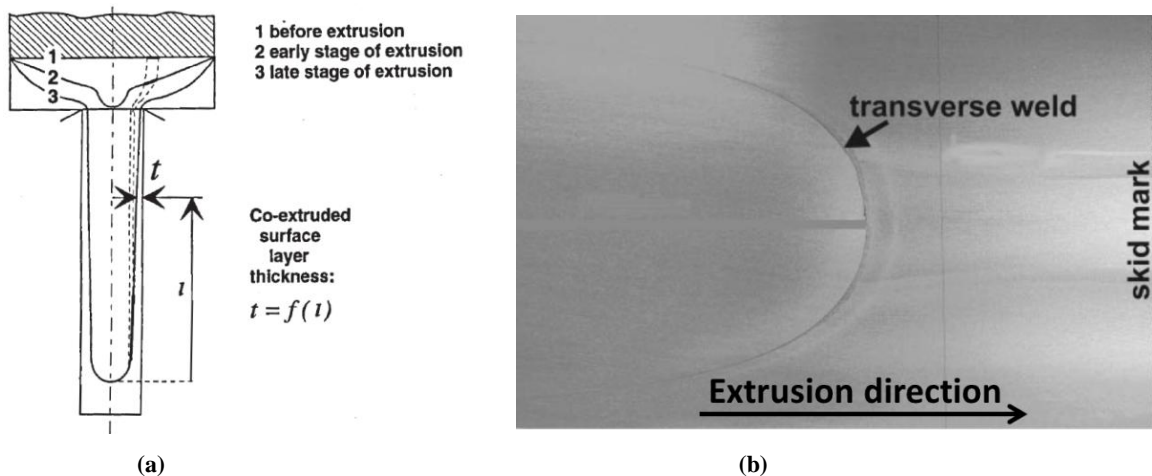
(a) Schematic of the transverse weld formation [86], (b) Longitudinal section of extrusion showing the front of the transverse weld [100].
